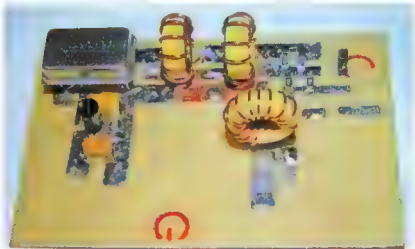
An example of using wide and narrow tracks – planning and building stage.
